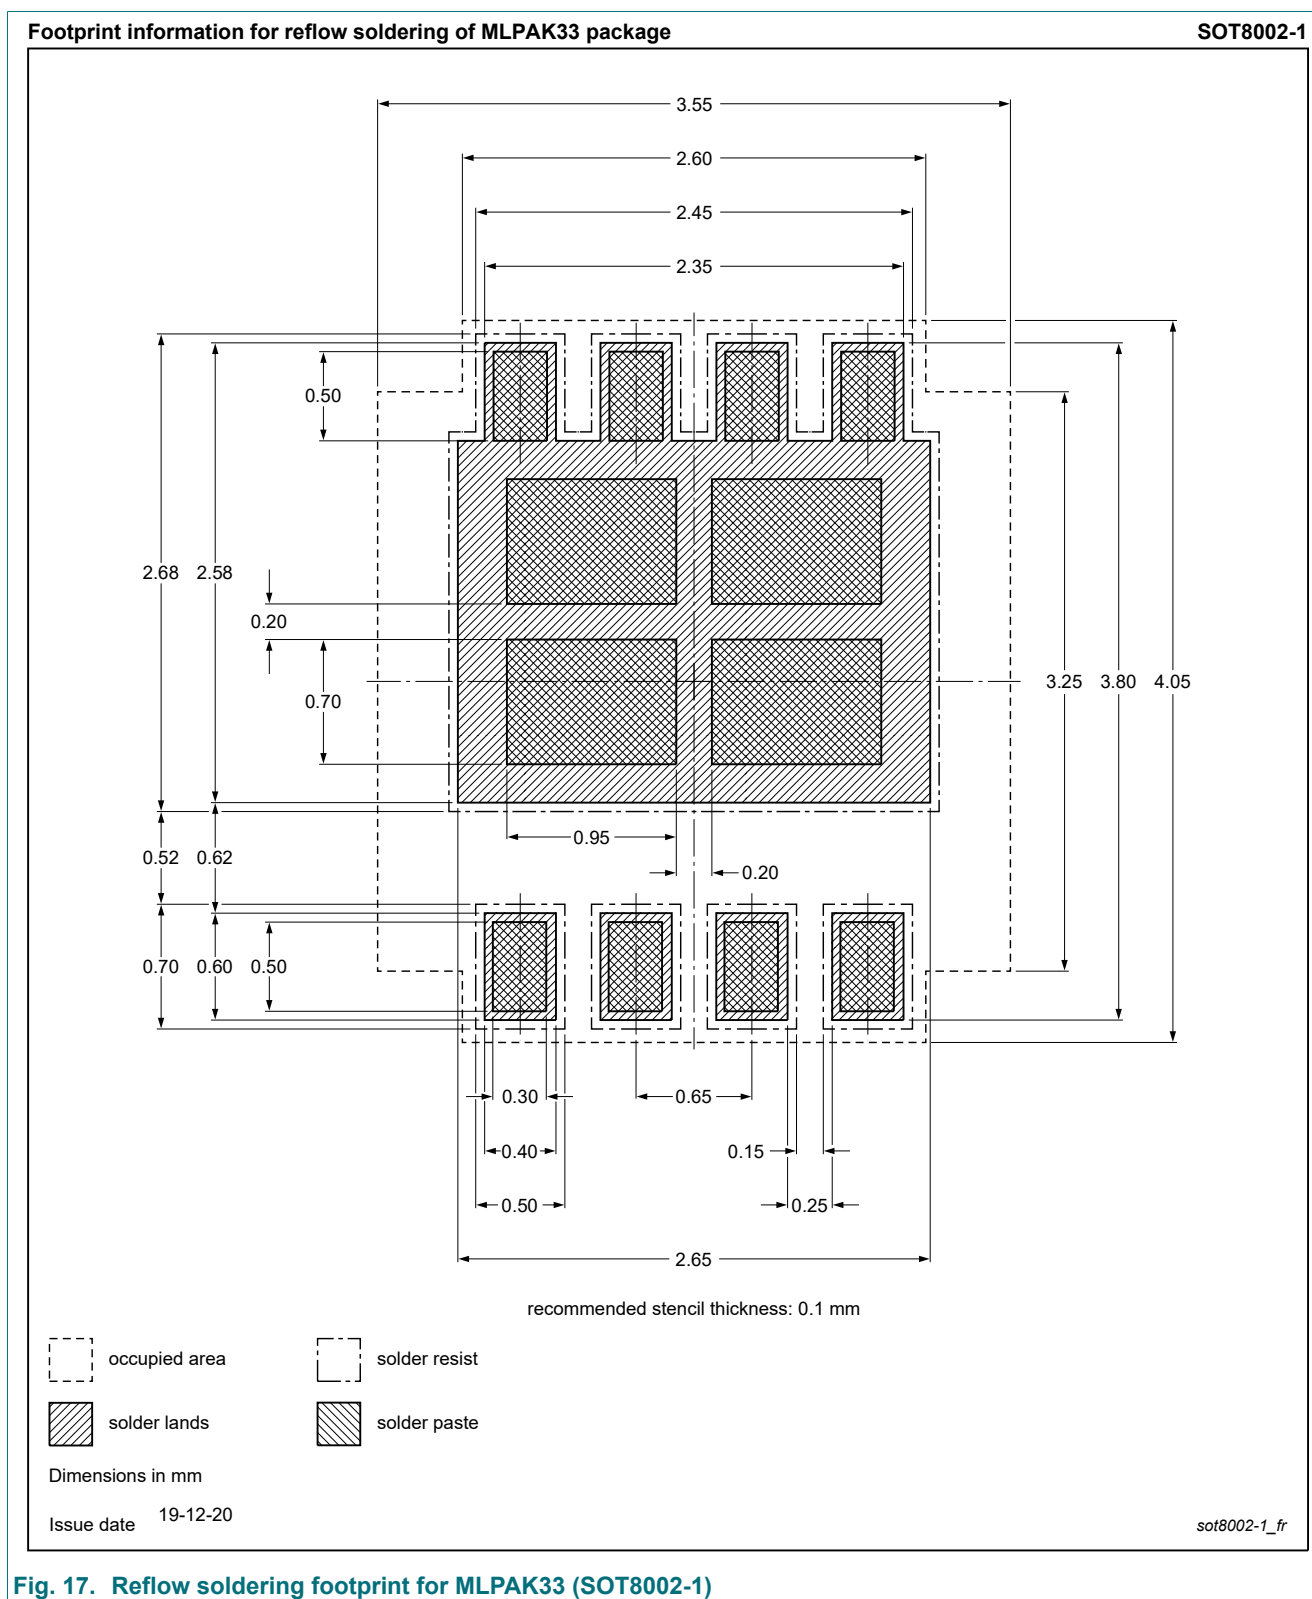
Reflow soldering footprint for MLPAK33 (SOT8002-1)
